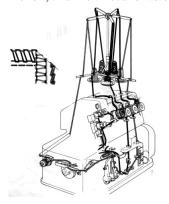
Threading on the sewing machine MO-2516-DD4-30 "Juki" (Japan)
